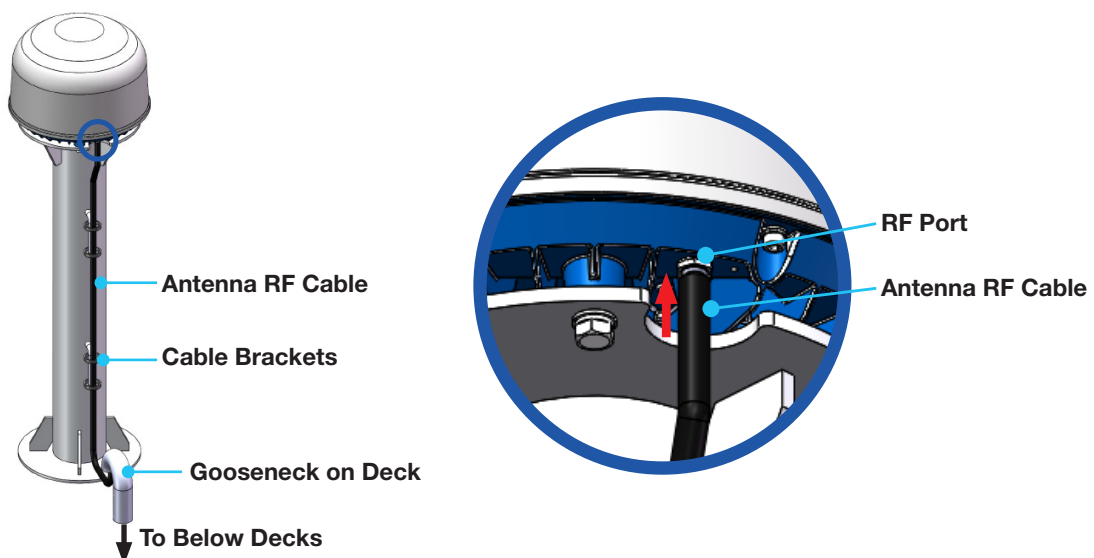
Connecting Antenna RF Cable using Outer Holes (with M10 Bolts)
